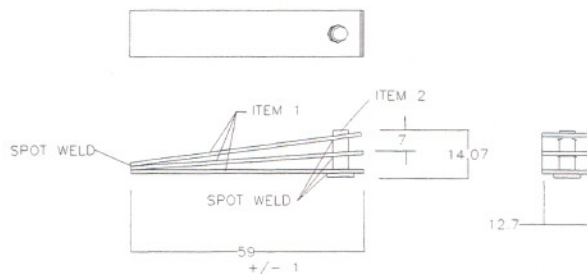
Mechanical drawing for nail clipper assembly. All dimensions are in millimeters.
